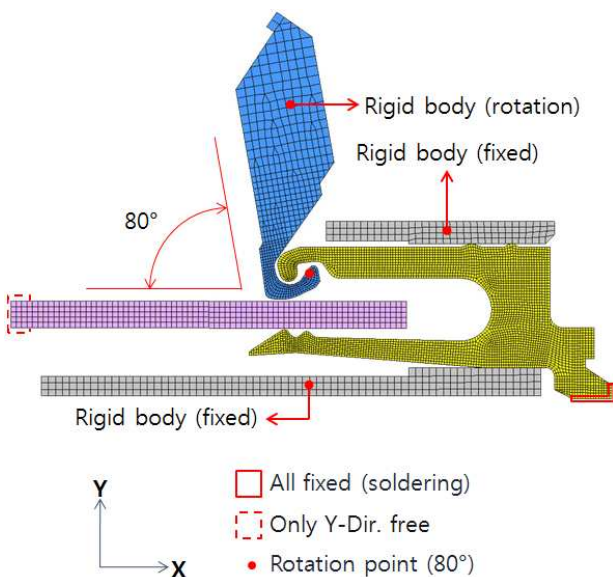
Finite element model and boundary condition of FPCB connector for assembly analysis
